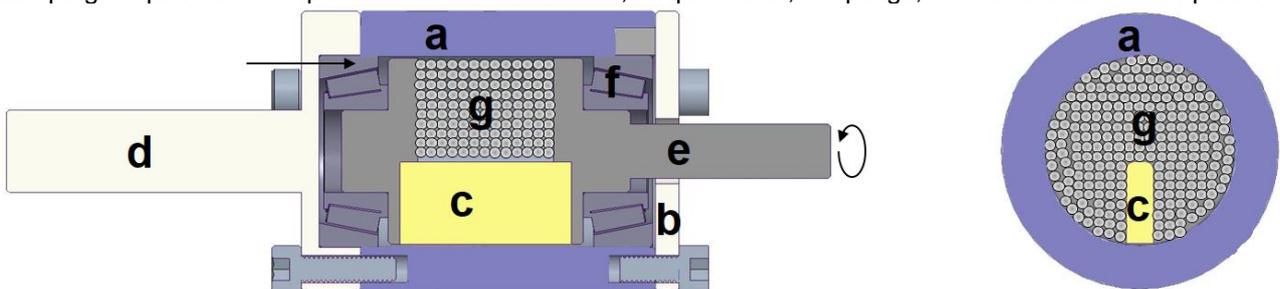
Schematic diagram of rotary damper a. Body, b. Cover, c. Rotor, d. Holder, e. Shaft, f. Bearings, g. elastomer particles
